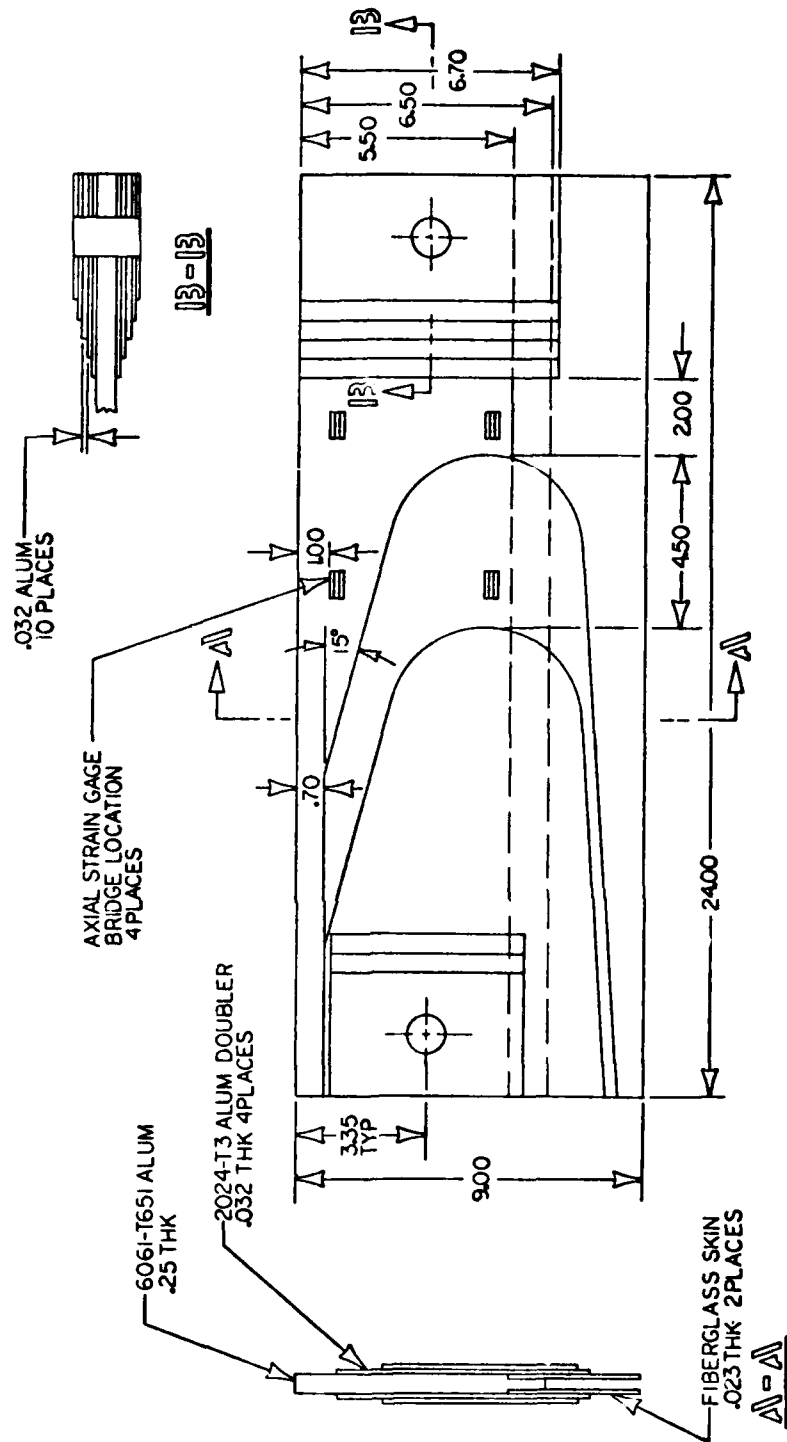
Root Doubler Bond Fatigue Test Specimen Schematic.
